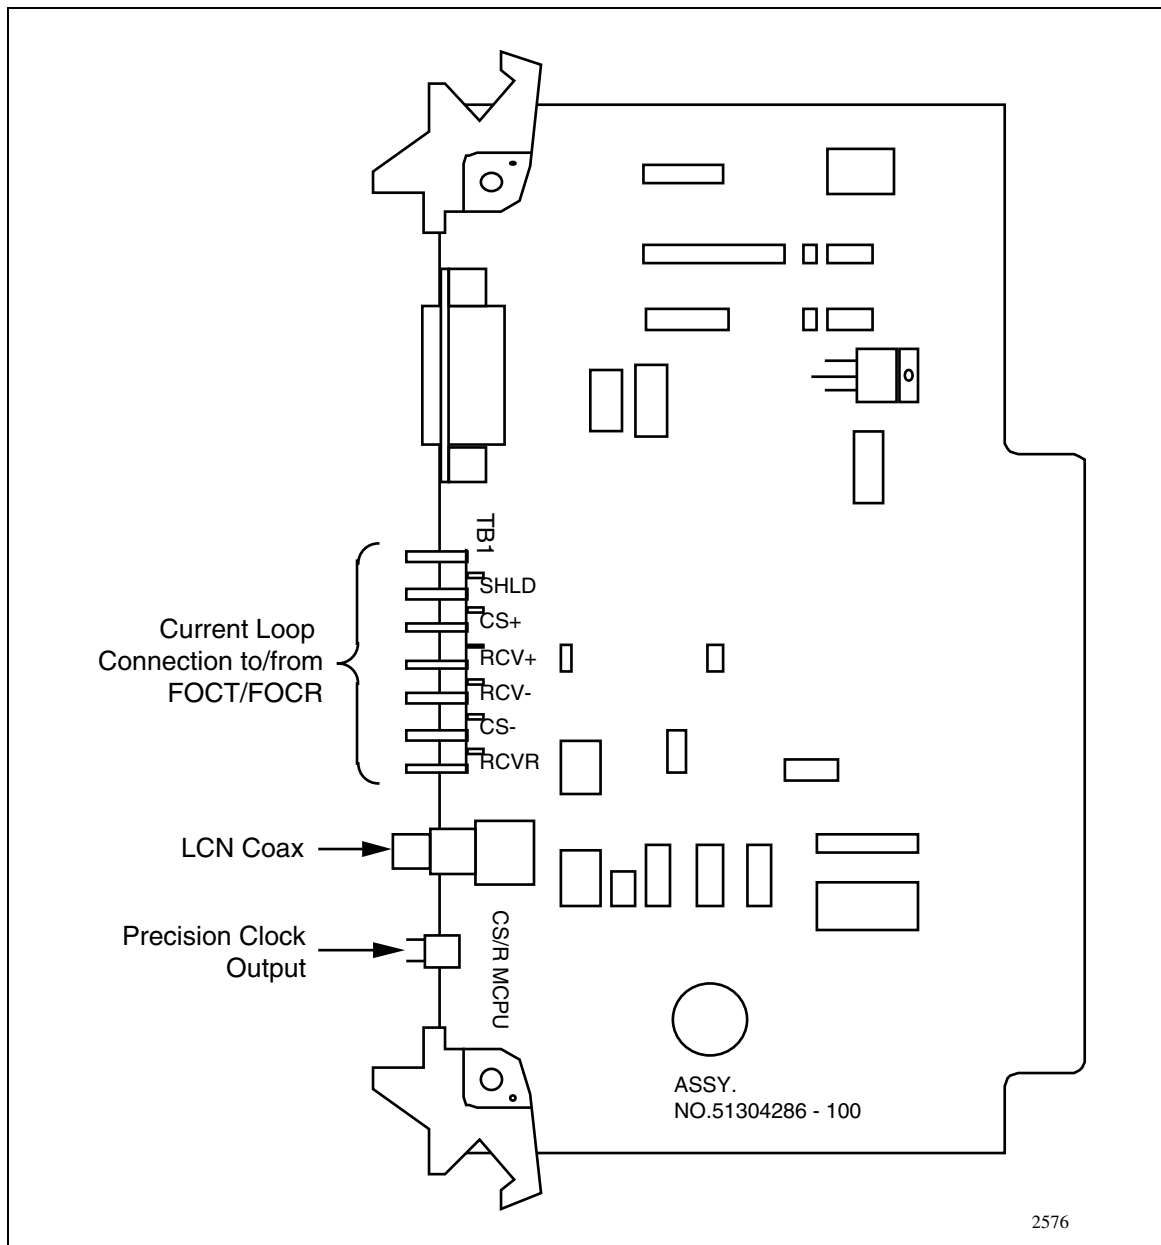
Clock Source/Repeater (CS/R) Board Assembly
